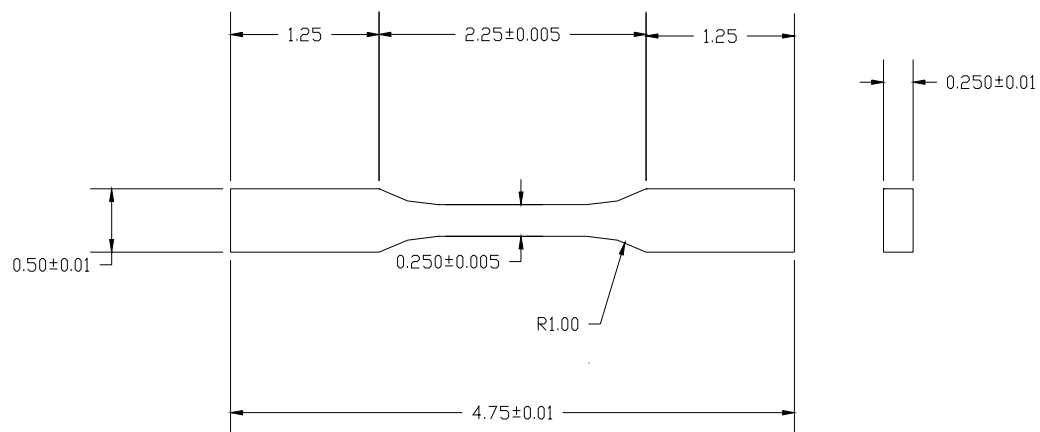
Specimen geometry used for tensile, fatigue, and corrosion-fatigue testing (dimensions in inches)
